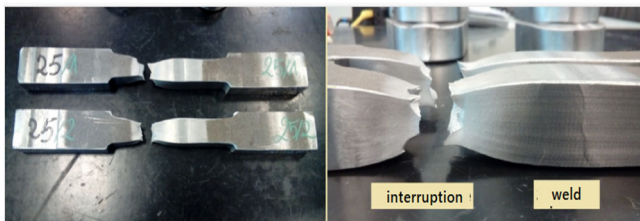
Samples S355JR $t=25$ mm after the tensile test. The crack occurred outside the weld
